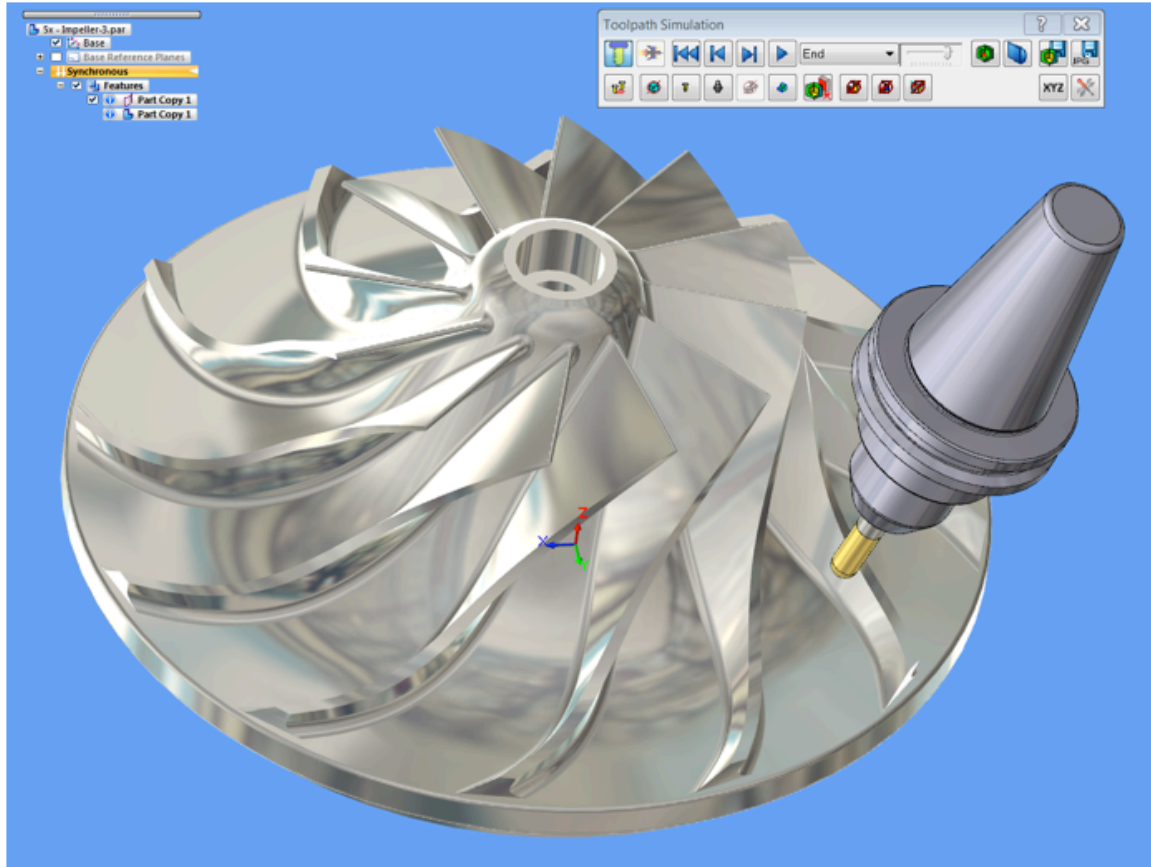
Geometric CAMWorks Toolpath Simulation of a 5-Axis Machining Operation
